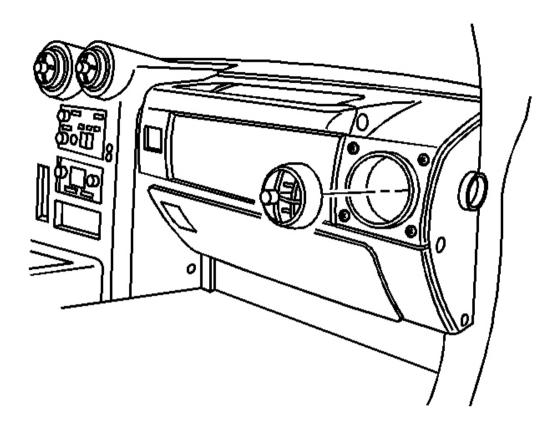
Air Reflector Louver & Trim Panel Courtesy of GENERAL MOTORS CORP.
